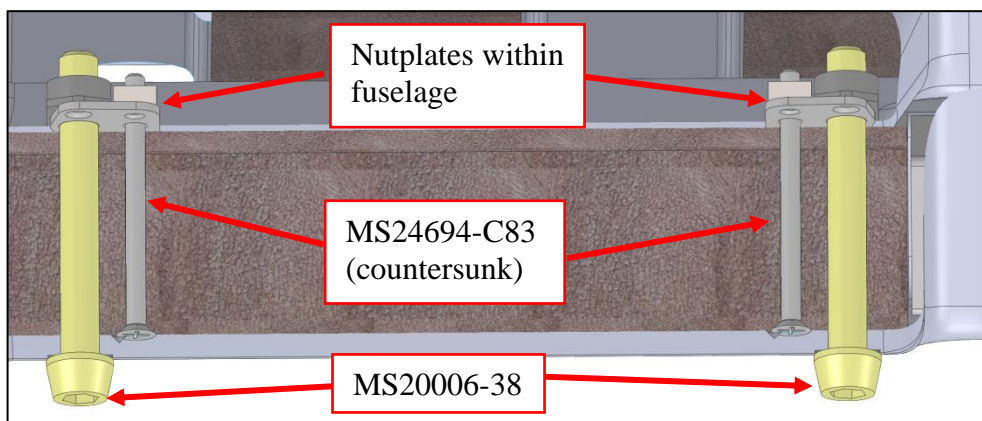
Nutplates and bolts – schematic view (without landing gear bracket)
